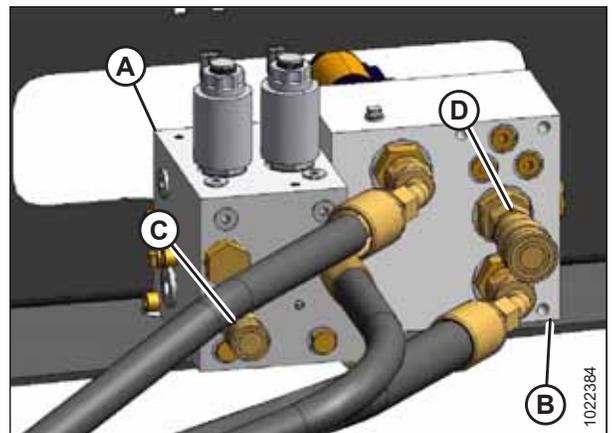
Manifolds without Reverser Manifold Configured for Auger Header – M155 Shown, M200 Similar
